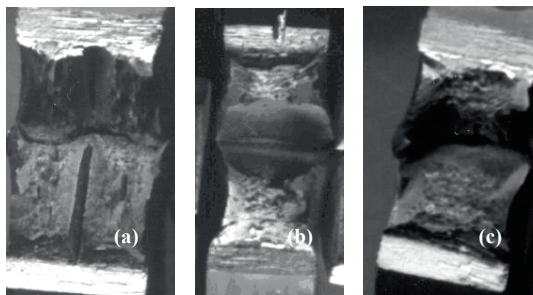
Typical fracture surfaces of Charpy V-notch specimens
